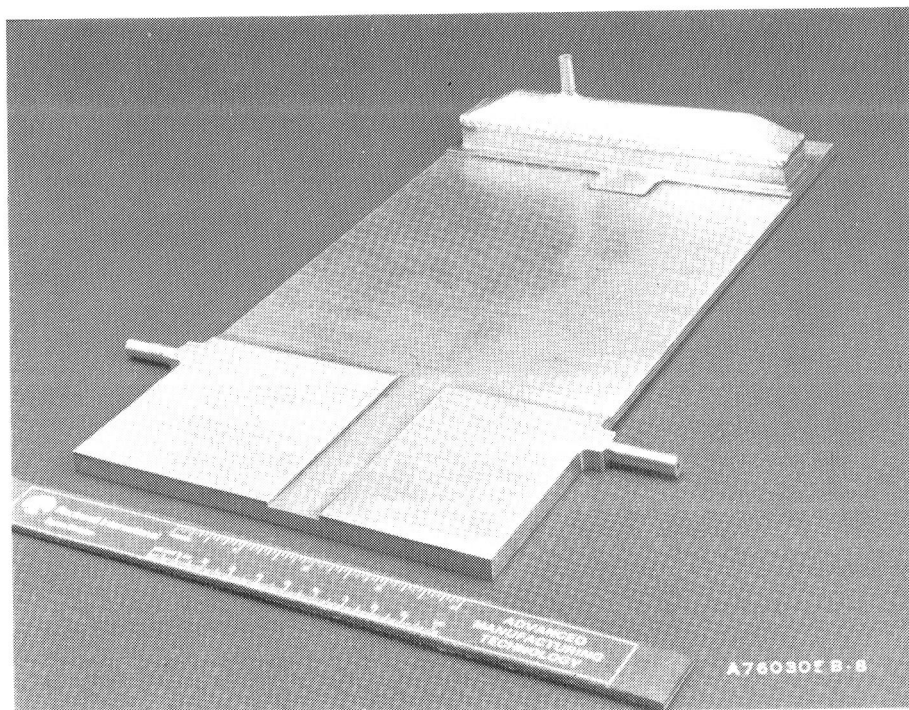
EPISTS Brazed Panel after all Welding, Heat Treatment, and Final Machining
